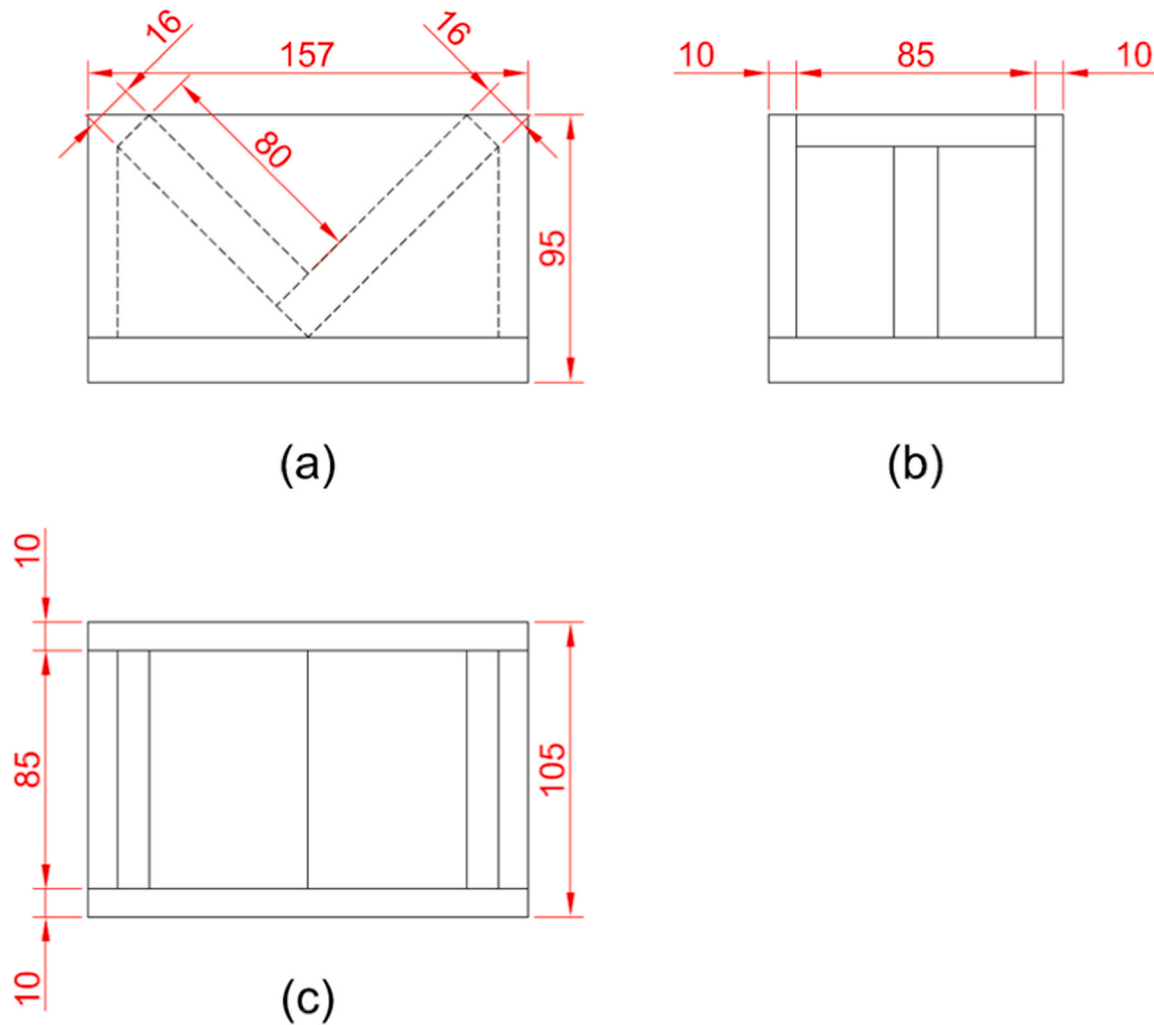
Geometry of the steel shoe used to apply the load (dimensions in mm): a) front view; b) lateral view; c) plan view.
